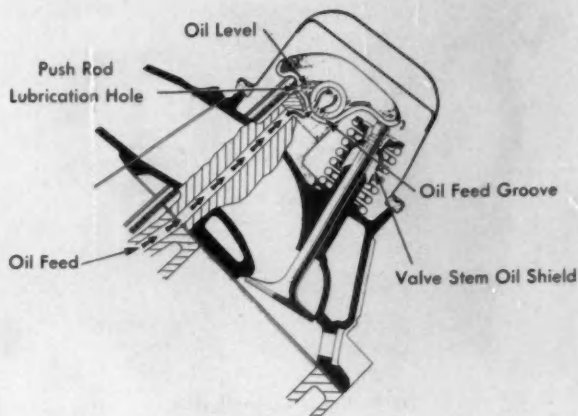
Cylinder Head Valve Mechanism Lubrication.
